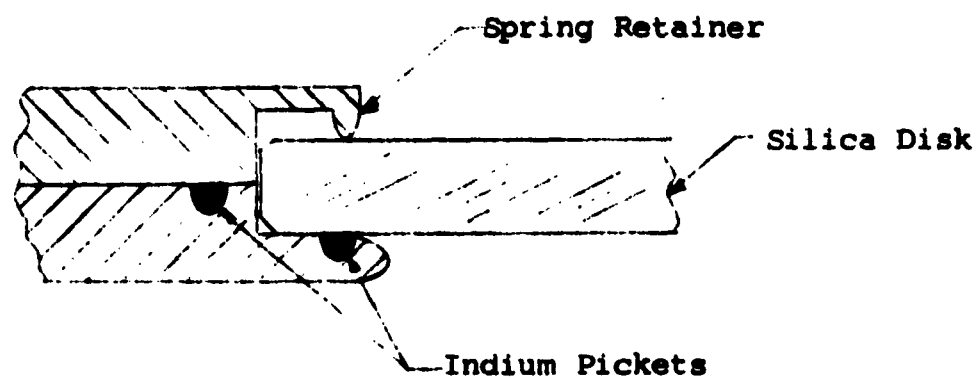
Faying Surface and Fillet Sealed Glazing Assembly (Ref.40)
